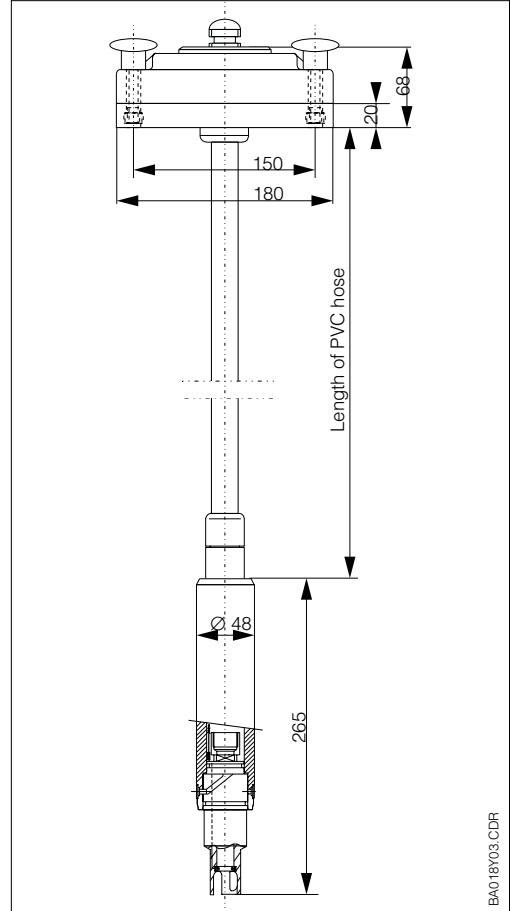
DipFit W CPA 530 with oval flange and mounting plate
